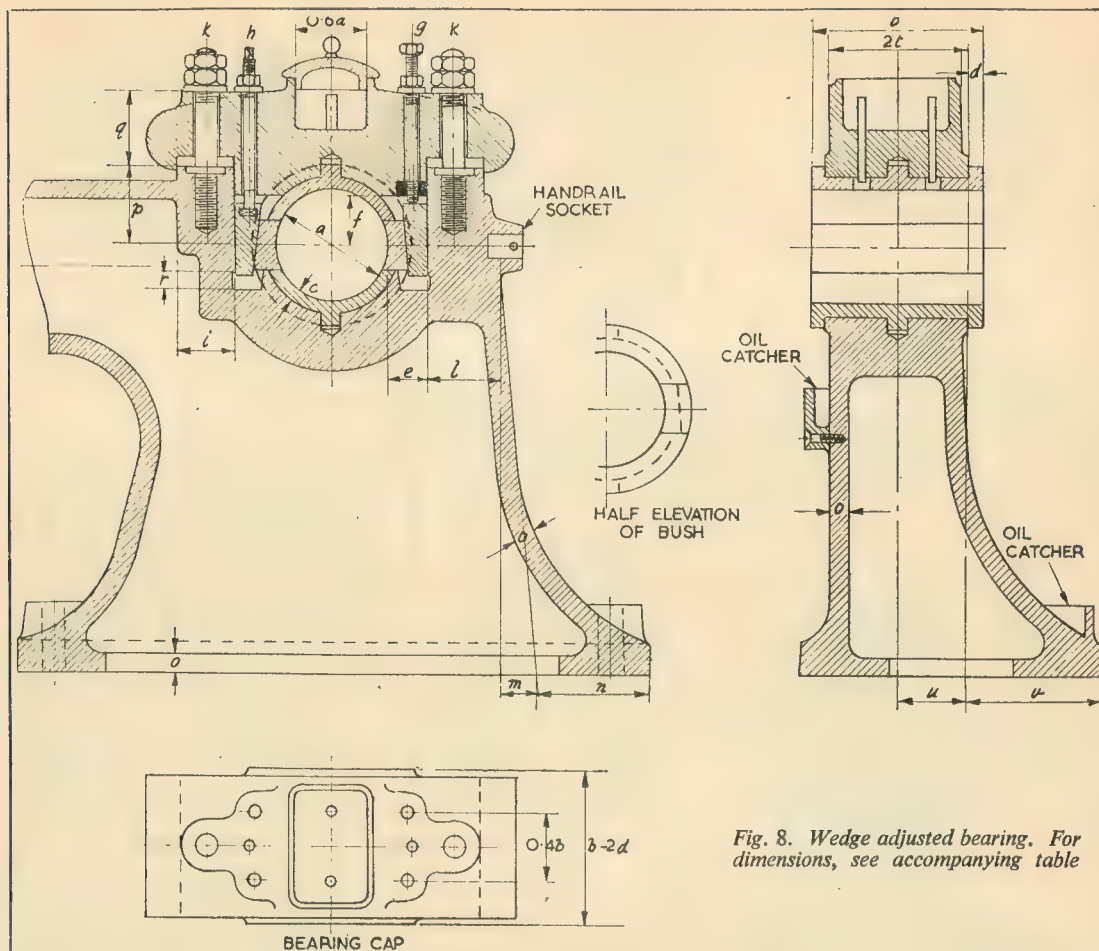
Wedge adjusted bearing. For dimensions, see accompanying table
